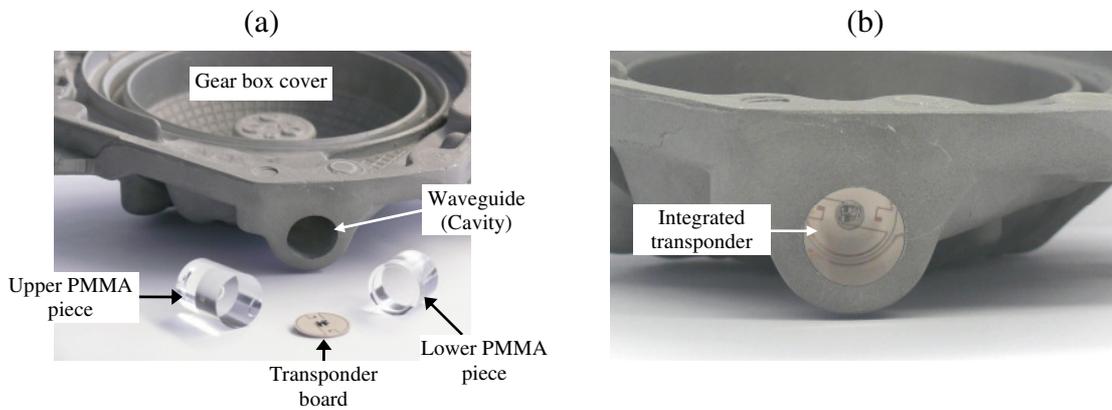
(a) Gear box cover with transponder components; (b) integrated transponder.
